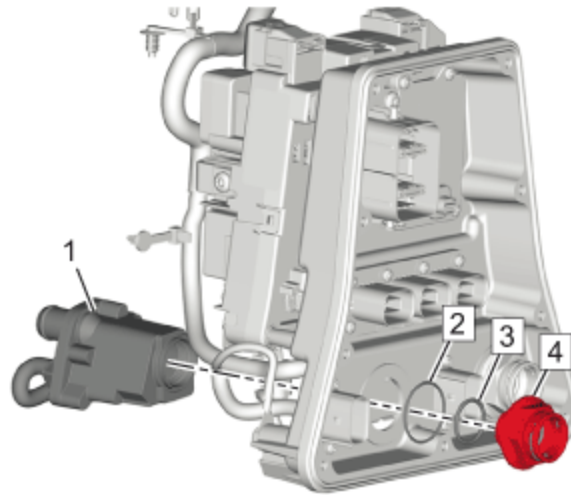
High Voltage Battery Heater And High Voltage Heater Outlet Hose Fitting
